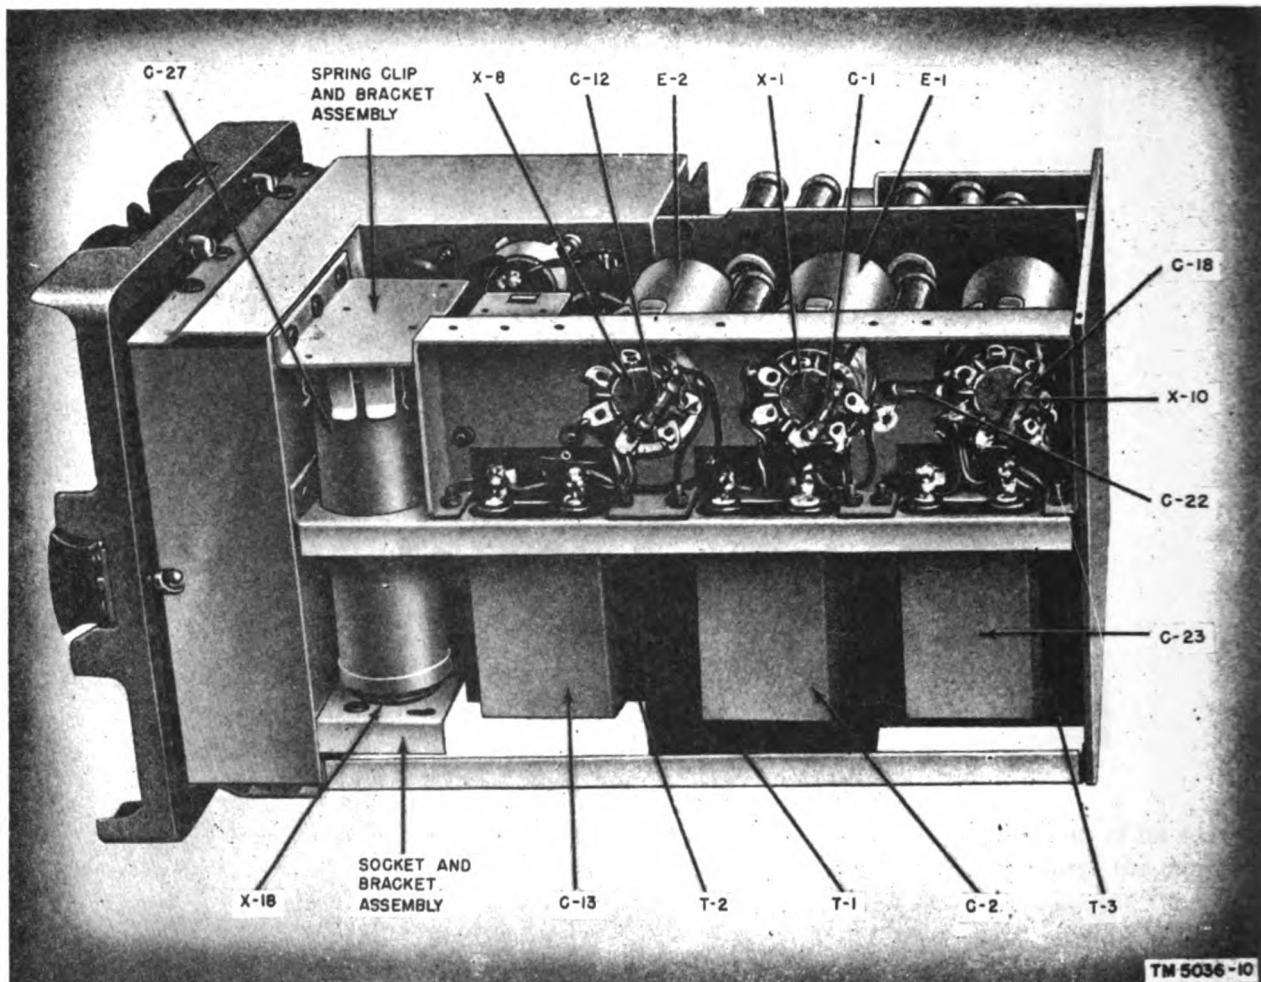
Power Supply PP-109/GR, bottom view of chassis.
